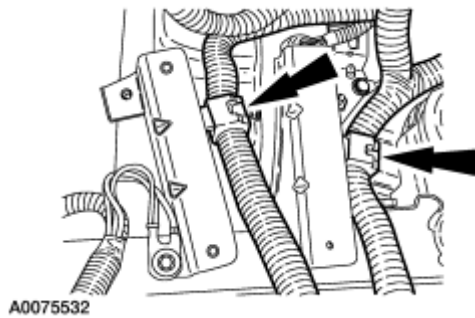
Locating Battery Tray Bracket & Wiring Harness
